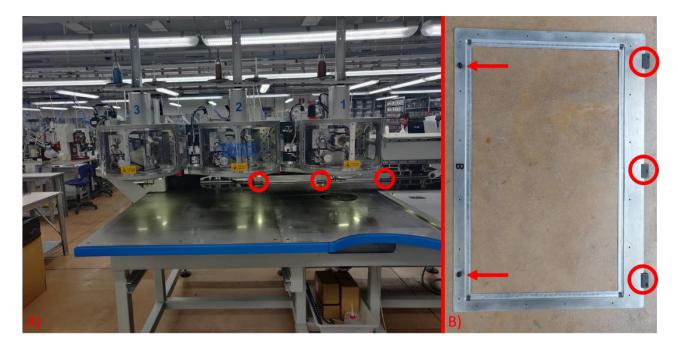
A) locking holes position in the machine. B) the circles represent the parts that will be locked into the machine and the arrows indicate the knobs.
